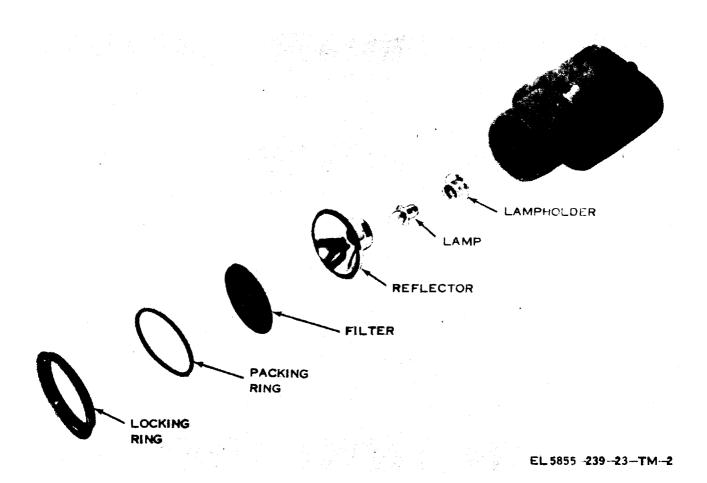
Light source filter, reflector, and lamp disassembly.
